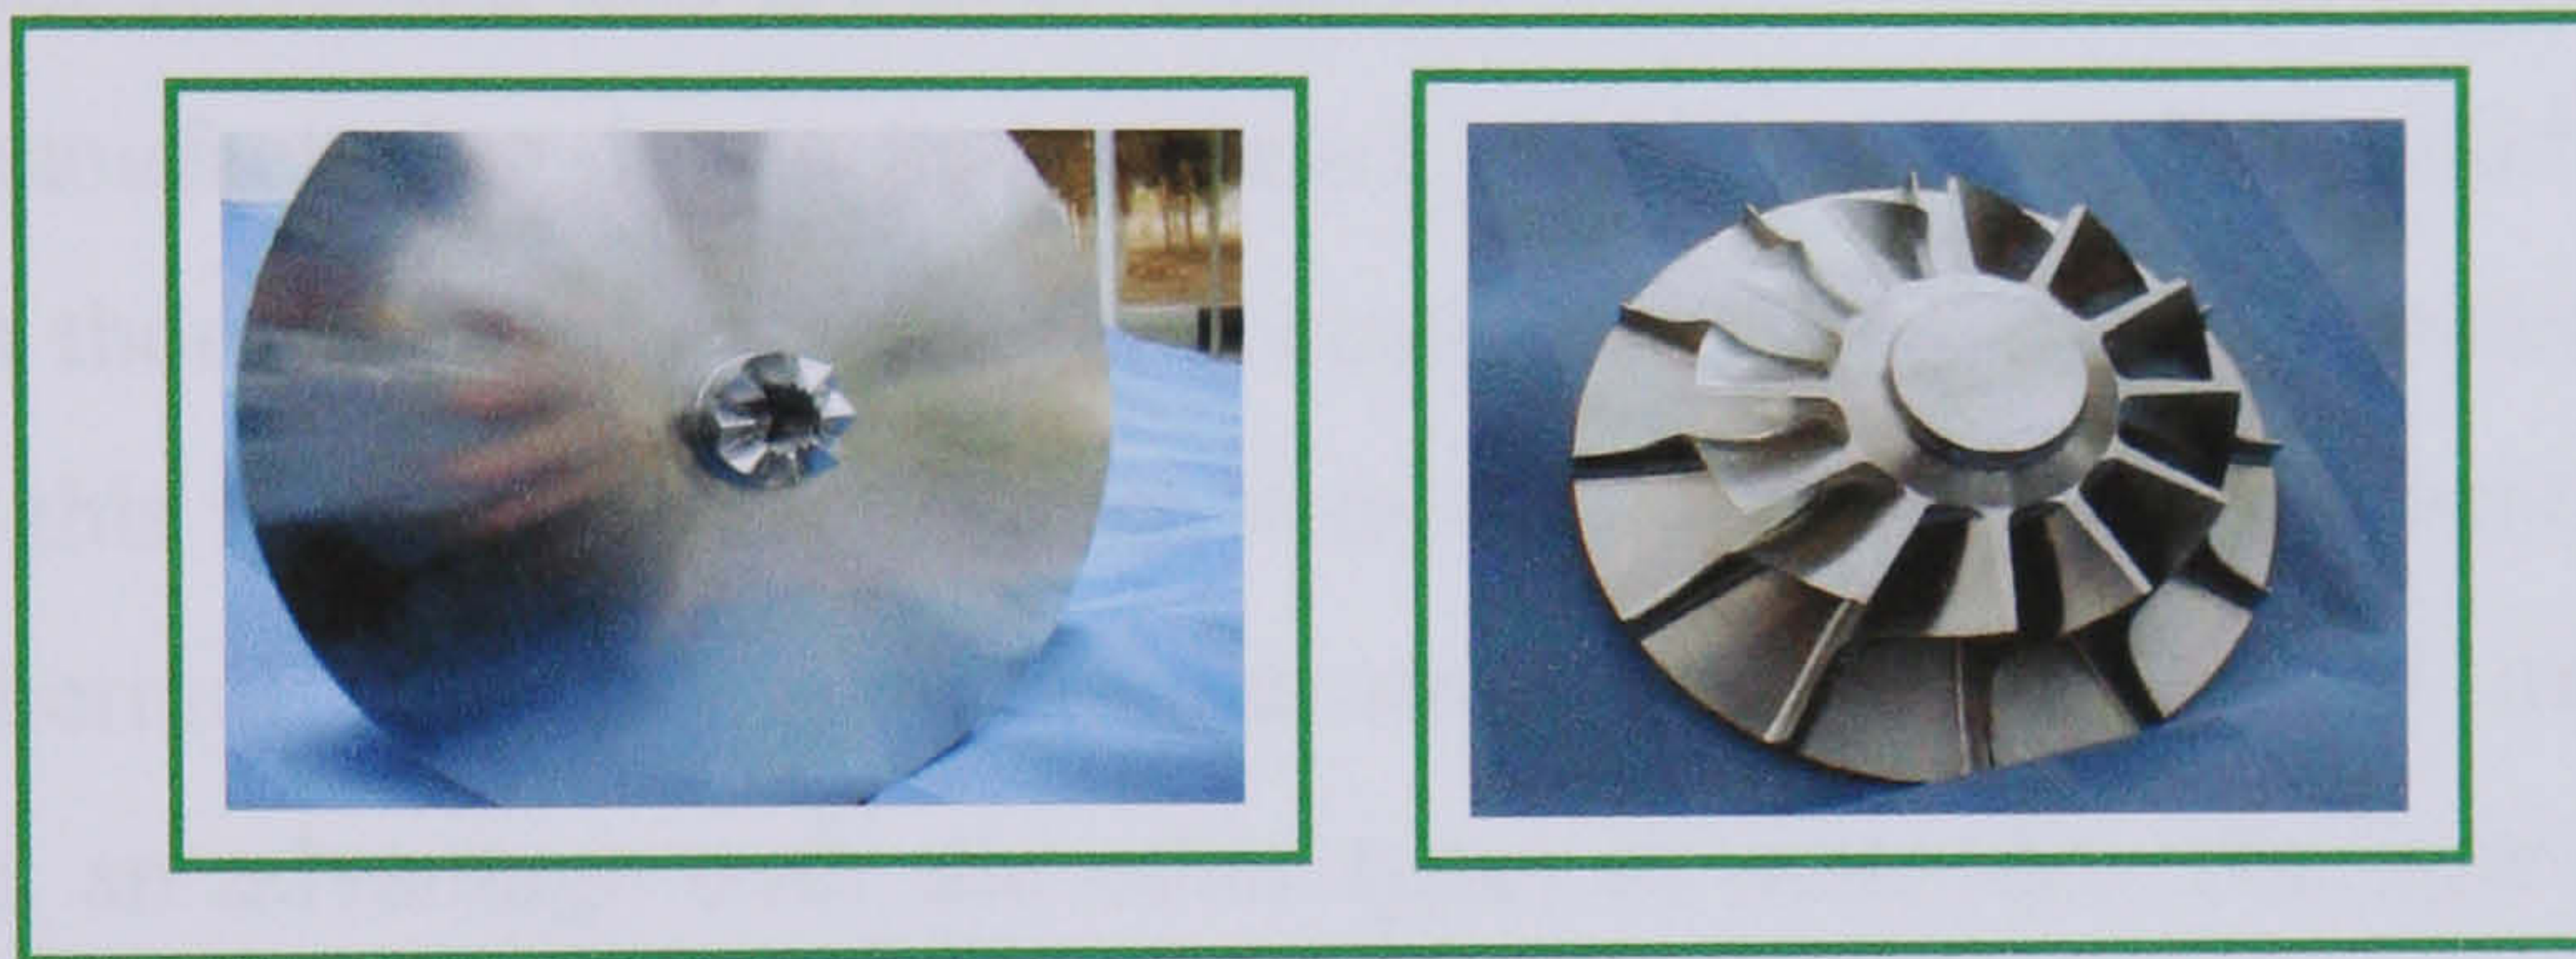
TURBINE ROTOR MACHINED FROM INCONEL ALLOY-718
